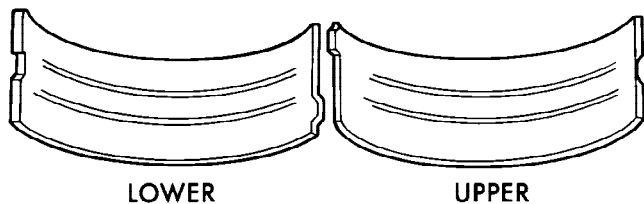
Scoring Caused by Insufficient Lubrication or Damaged Crankshaft Journal
